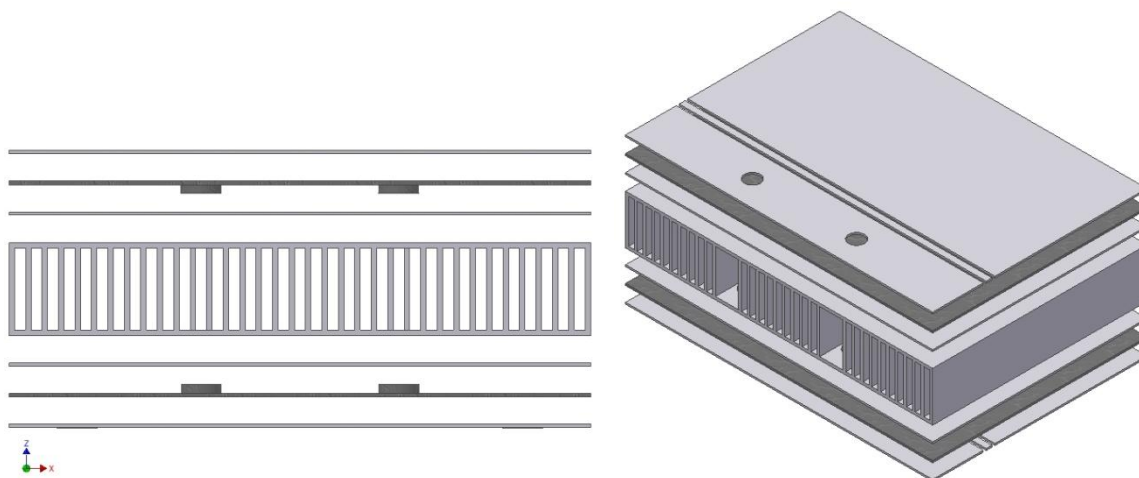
Front and isometric views of an exploded module assembly to illustrate the 7 layers
